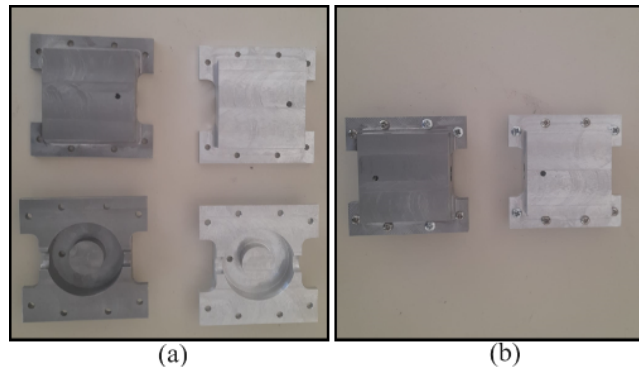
Fabricated cavities (The dark grey is steel and the light grey is aluminum) (a) unassembled pieces (b) assembled pieces
